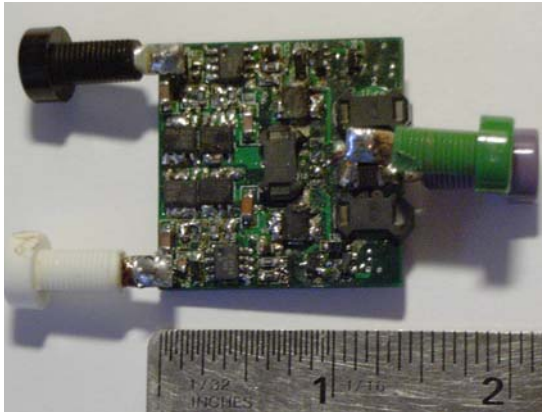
Photo of the prototype; size 1.41"x1.41"(3.6x3.6cm)
